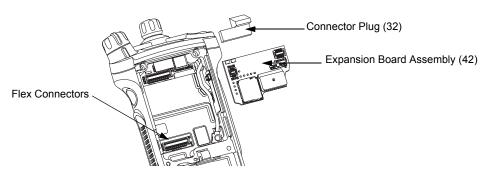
Remove Flex Connectors and Expansion Board Assembly
